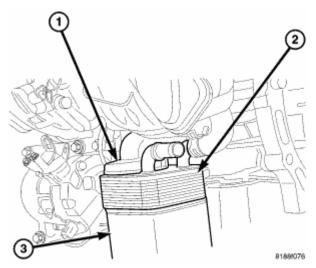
OIL COOLER Courtesy of CHRYSLER LLC
